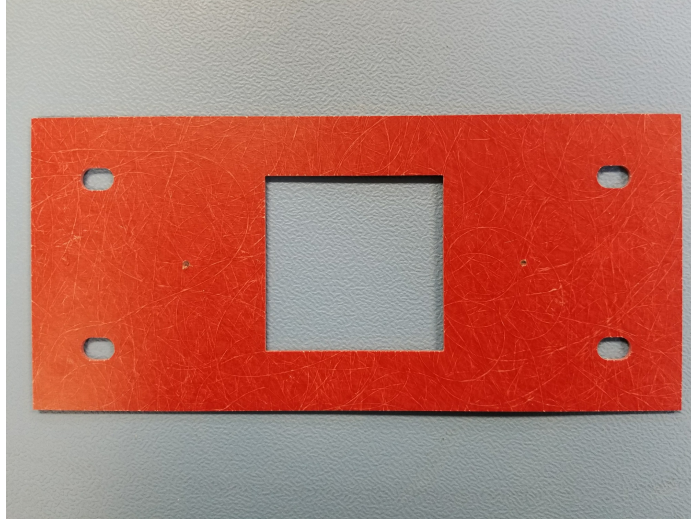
Custom PCB specimen mount used for positioning the specimen in the view of the FLIR camera while within the vacuum chamber
